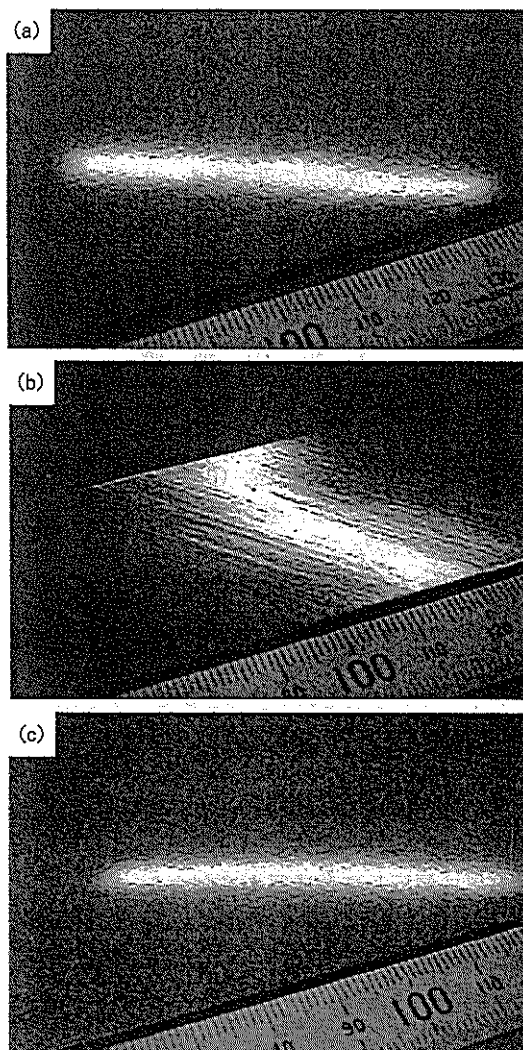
Surface appearance of 6016 alloy sheet showing ridging mark (roping) after tensile test. The tensile direction is (a) 0° , (b) 45° and (c) 90° to the rolling one⁵⁷⁾.
